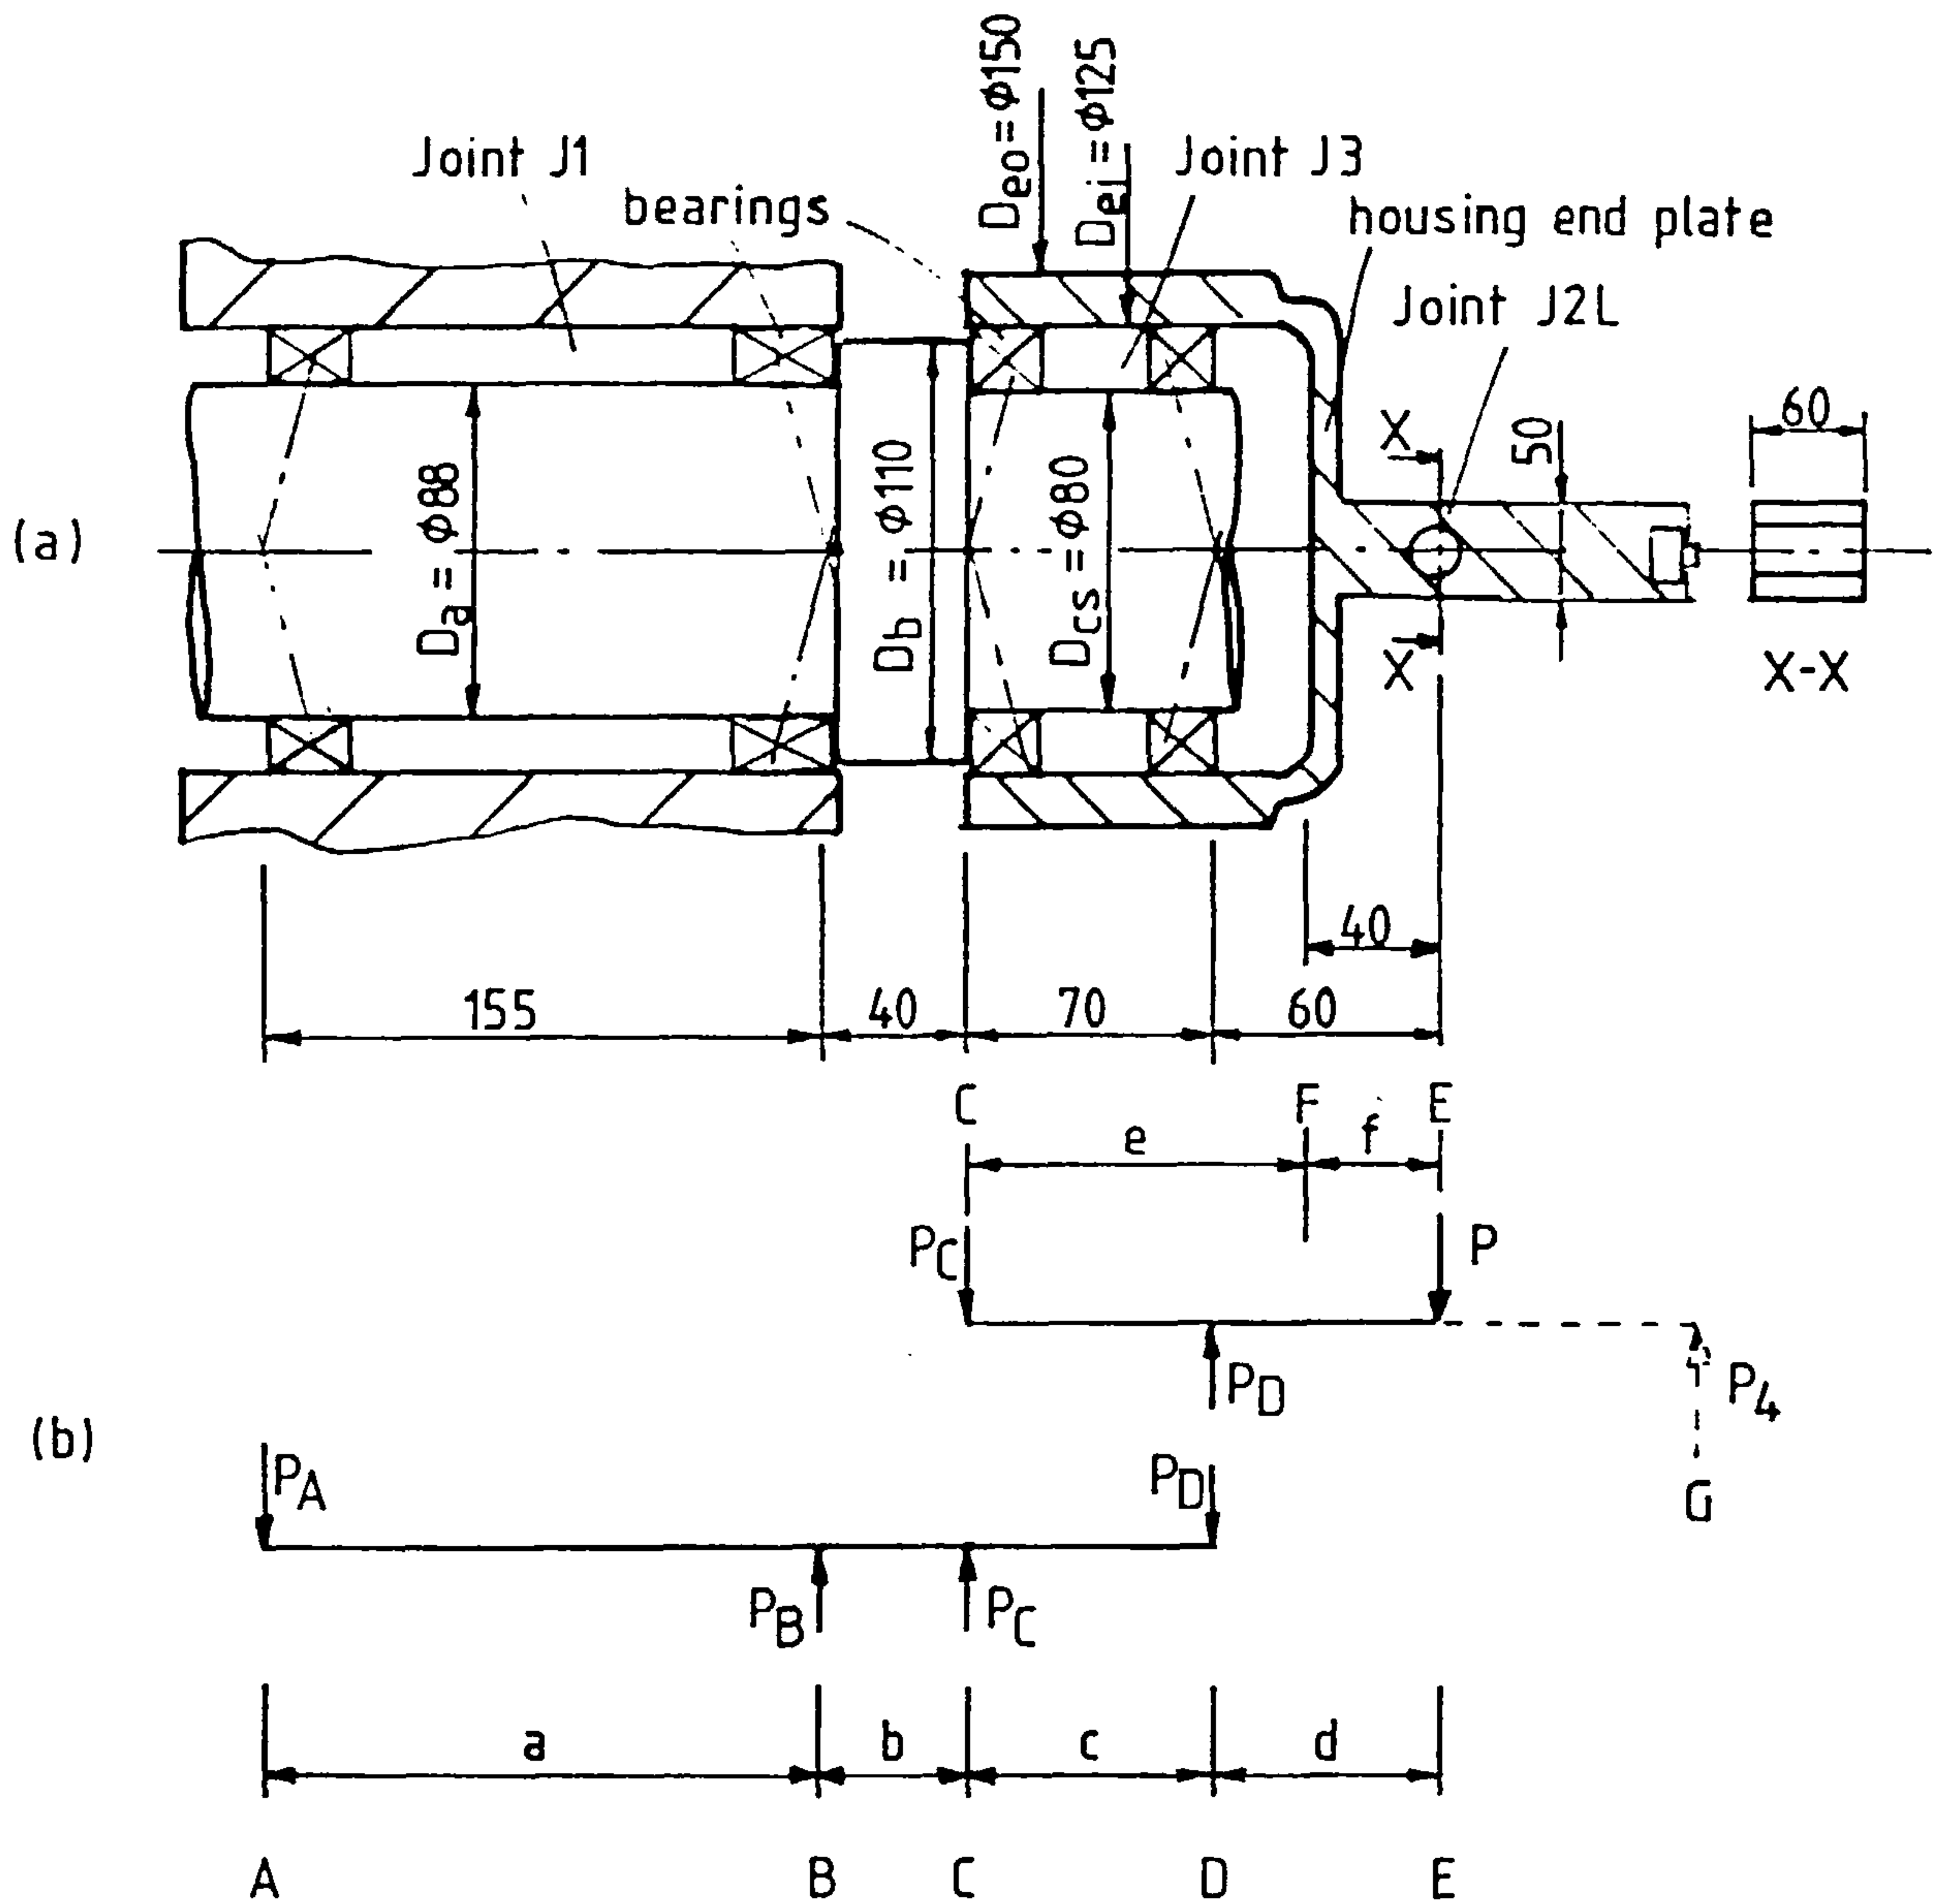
Main shaft assembly-deflection a) sketch of assembly, b) equivalent beams - loading.
